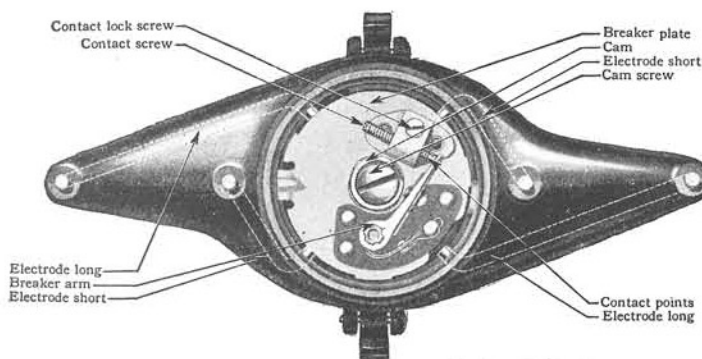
Top view of timer-distributor showing the breaker-contact (interrupter) mechanism and distributor electrodes. The distributor cap and rotor are removed.
